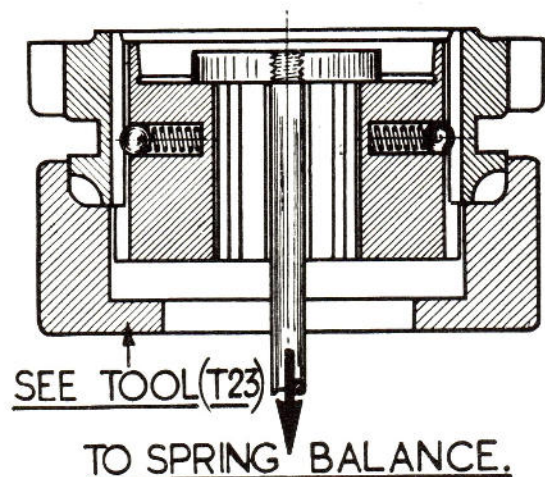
Testing "Second" speed synchro sleeve axial load.
